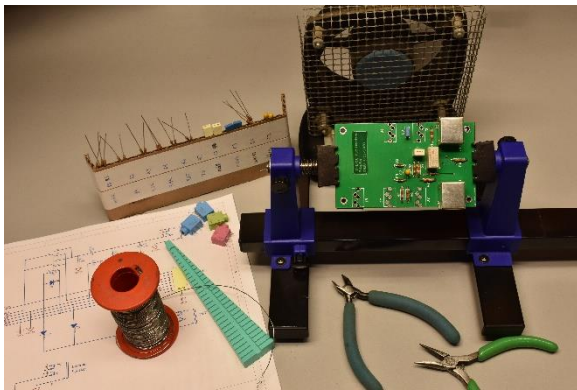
Installing parts on the PCB. Note the homemade “fume extractor” and a simple system for identifying parts.
